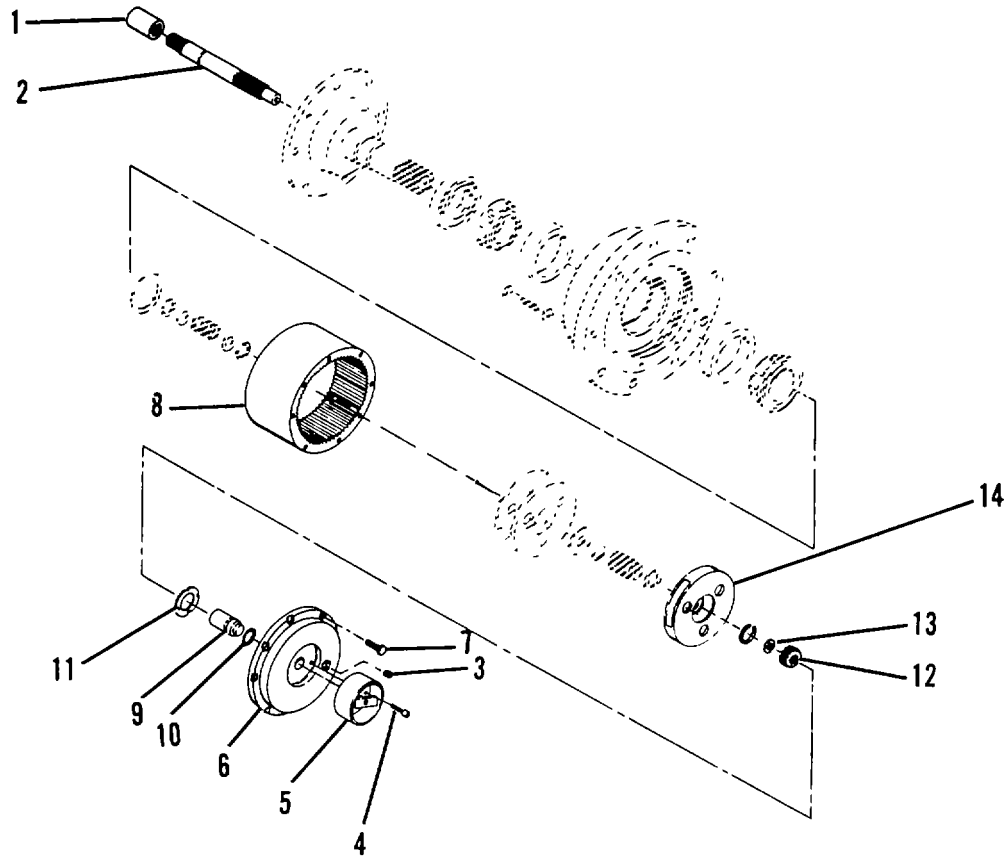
Drive Hub Assembly (Sheet 1 of 3).
